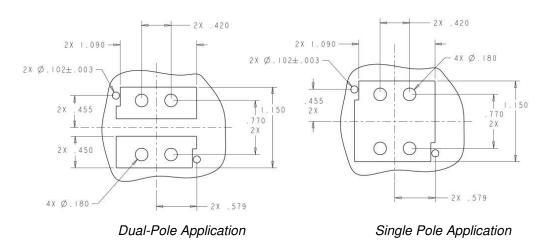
Bottom Screw-Mounting Bus Bar Board Layout View of P/N: 1926671-*.
